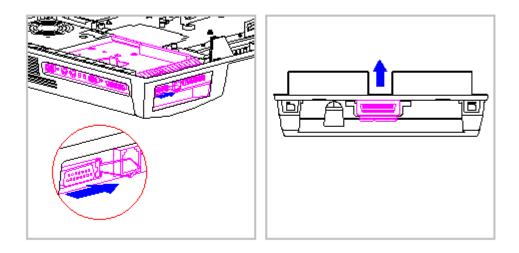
Removing the System Board/Battery Charging Compartment Assembly
